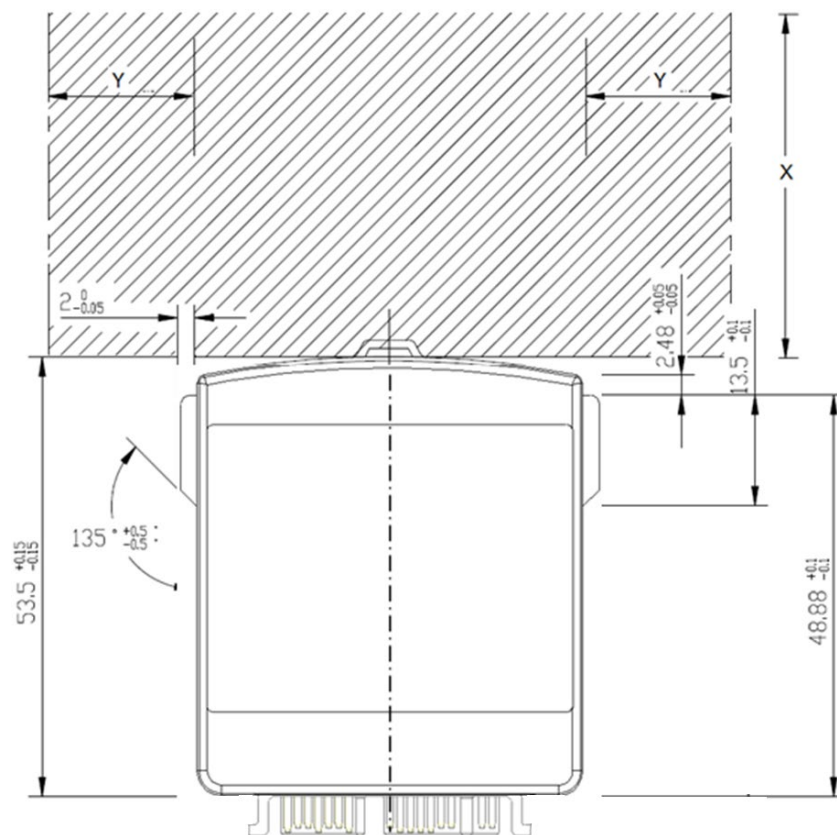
DC Form Factor Housing Dimensions – Top View
